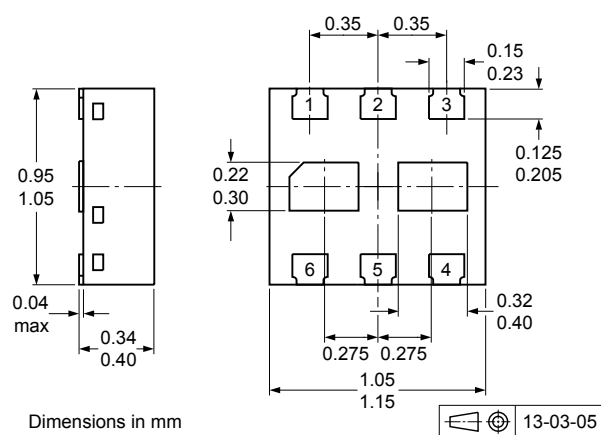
Package outline DFN1010B-6 (SOT1216)
